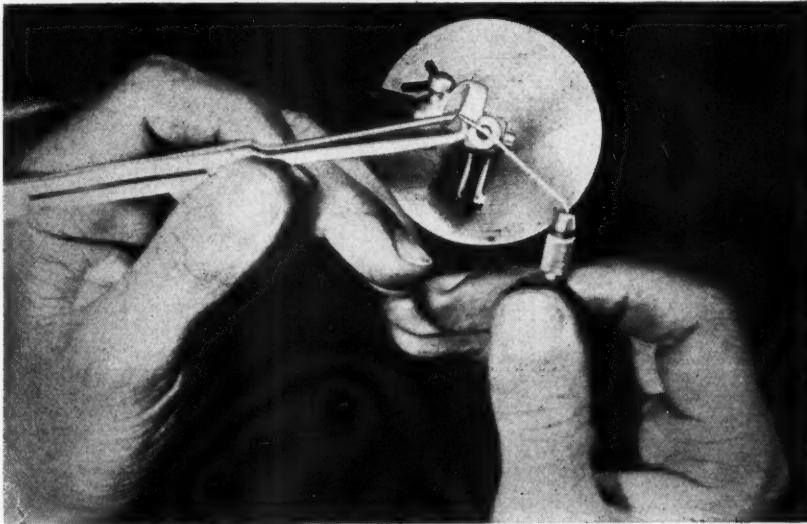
Clamping the laps between S.S.W. soldering pliers No. 340, placing flux on joint and uniting with Dee's 18K. solder.
